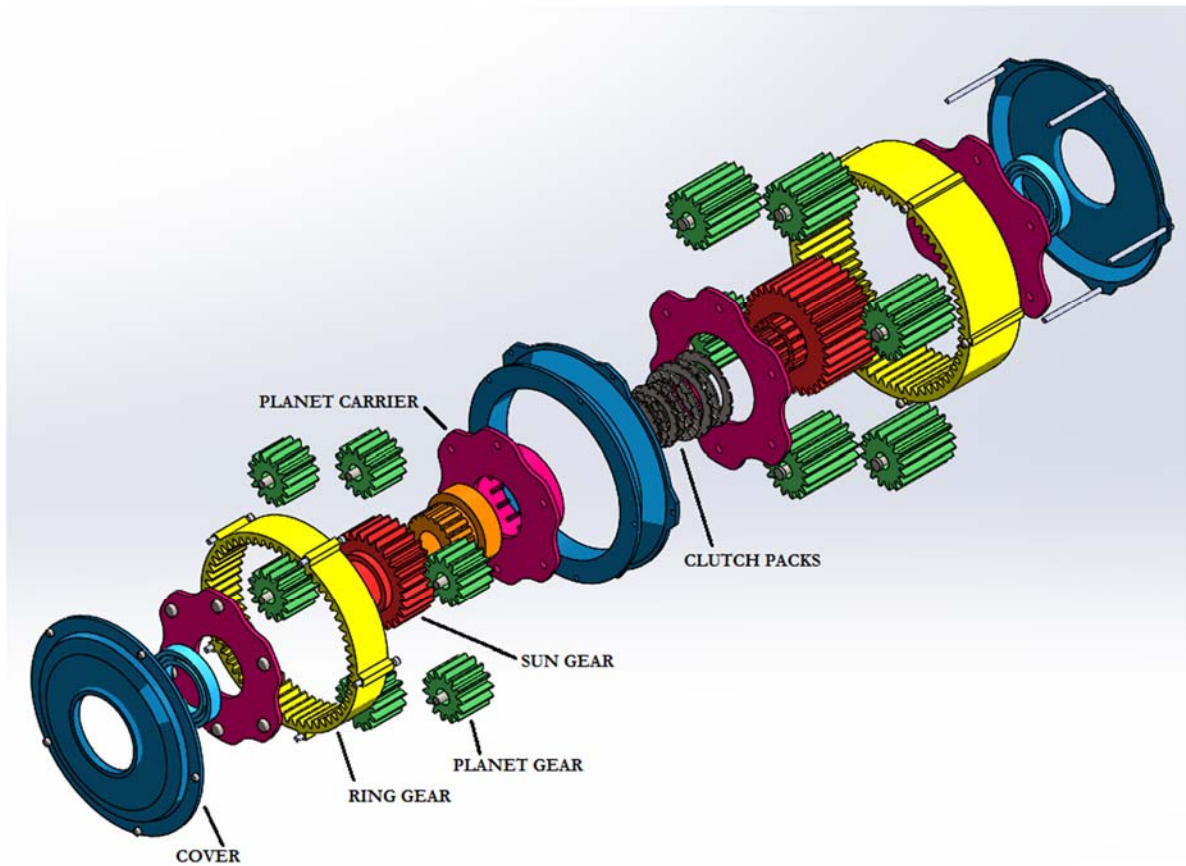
EXPLODED VIEW OF TRANSMISSION SYSTEM
